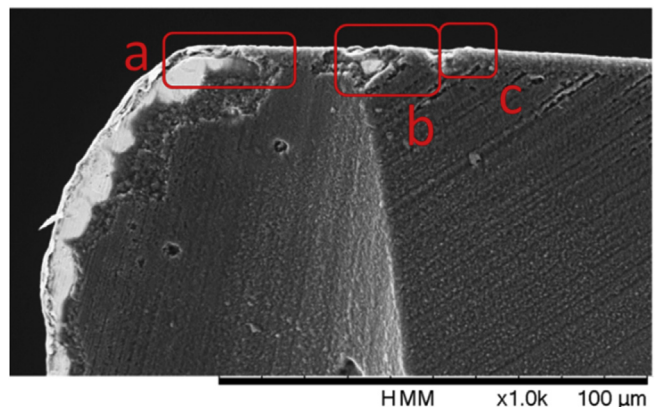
Examples of micro-chipping to the coating, exposing the tool underneath (a) shows the cross section of the tool on coating, where coating has been removed. (b) shows a smaller chip where the substrate is still fully exposed, and (c) shows a chip of partially removed coating.
